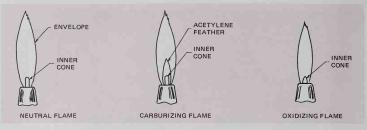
Left. Neutral flame. The inner cone is smooth and rounded. Fig. 7-9. Center. A carburizing flame has three distinct flame sections. The inner cone is inside of another cone called acetylene feather. Fig. 7-10. Right, Oxidizing flame, The inner cone is sharp and pointed. The envelope is shorter.
